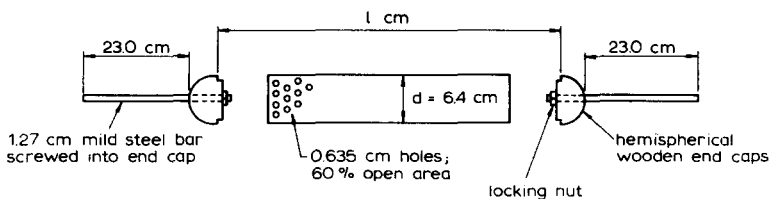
Exploded view of the perforated cylinder, the solid end caps and the supporting bar.
